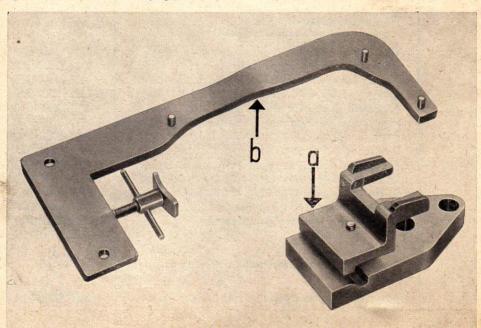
DKW-Universal-Assembly-Jig (Accessory unit for DKW-Hummel)
